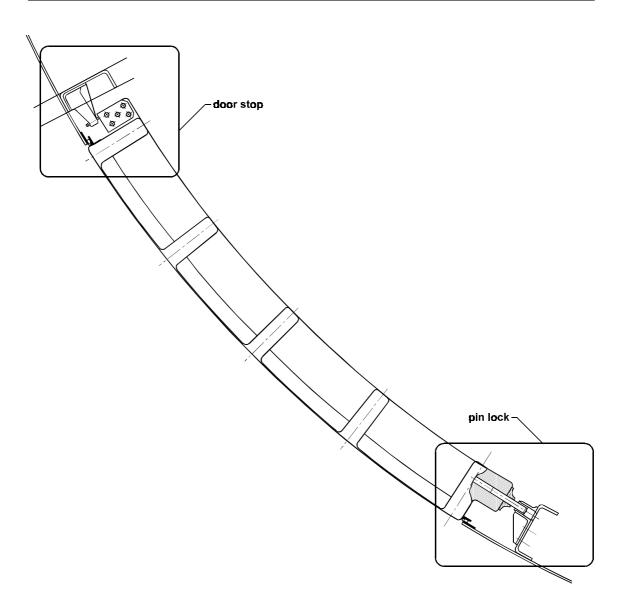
Schematic cross section of the hat stiffened door with pin locks and door stops
